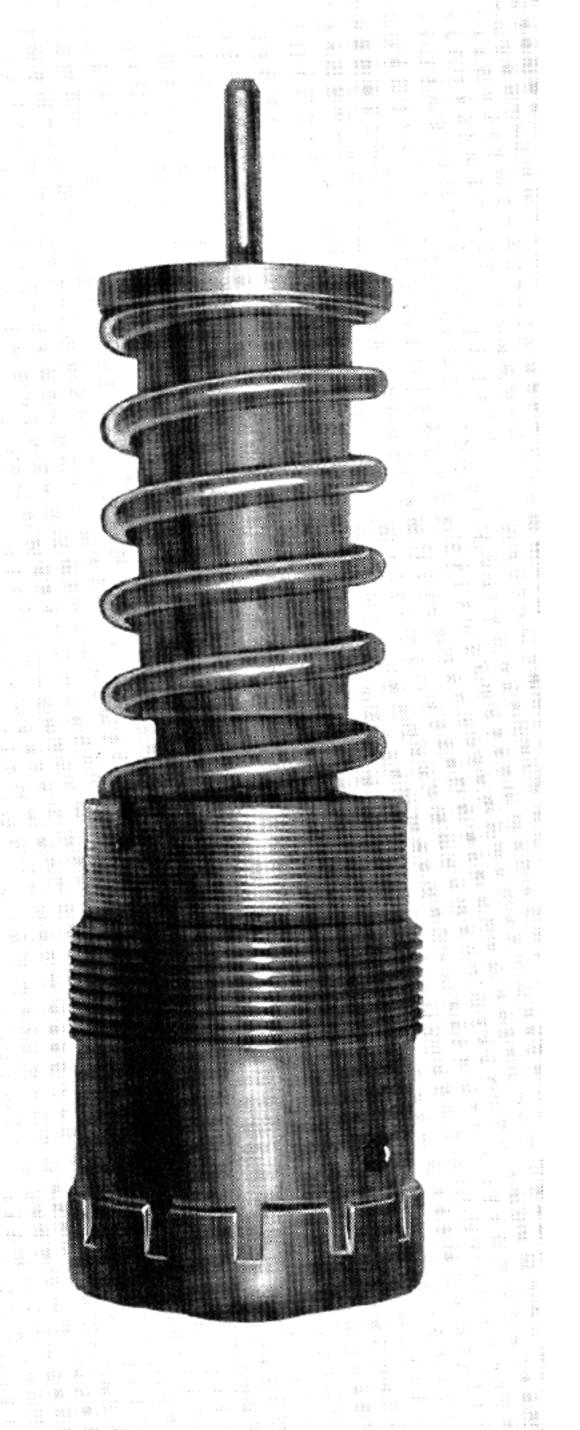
37-mm NS Gun. Recoil buffer assembly.
